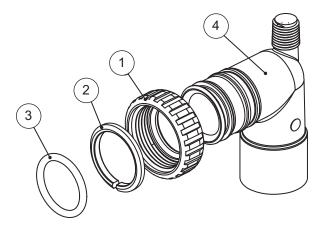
3/4" and 1" PVC Solvent Elbow Assembly (CV3007-01)
